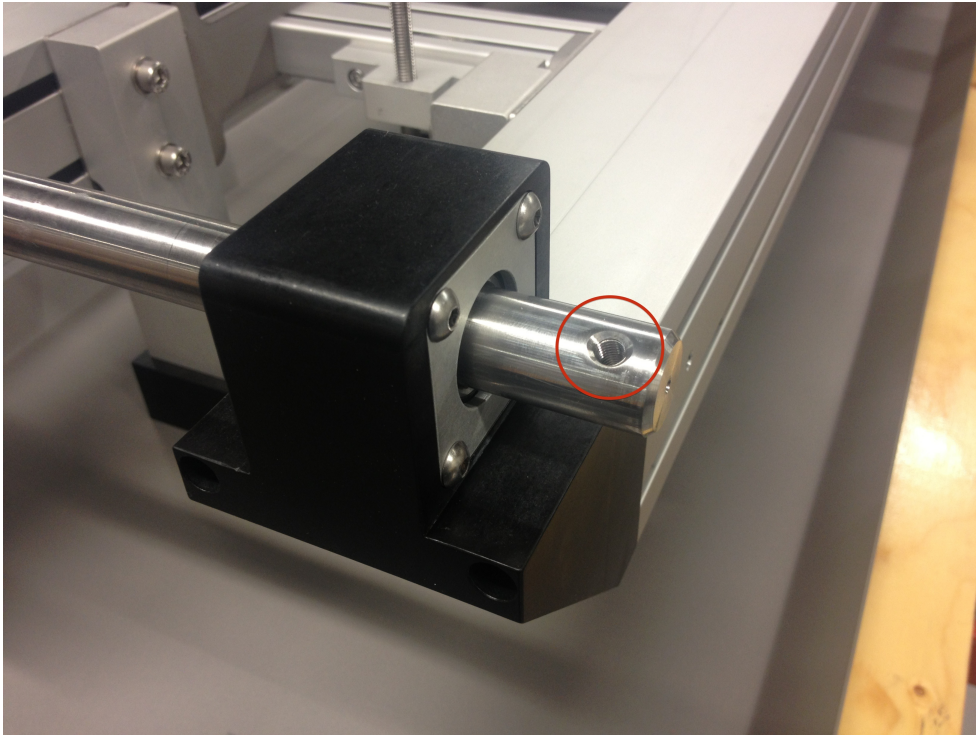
The handle can be attached to either end of the drive shaft for convenient location.
